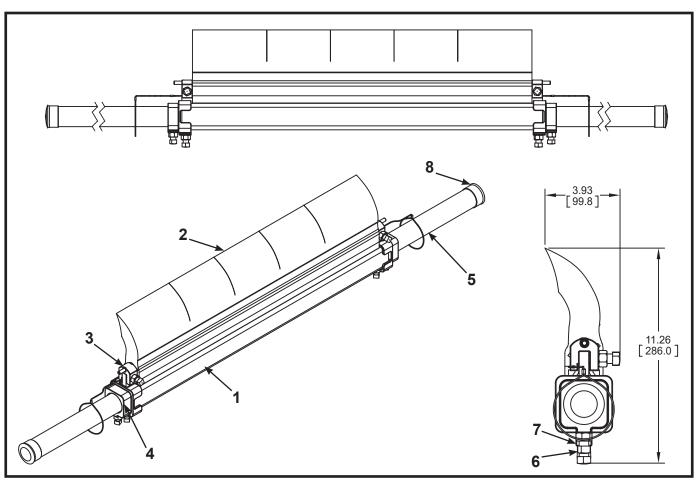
Martin<sup>®</sup> QC1+<sup>TM</sup> Cleaner HD with Three-Piece Mainframe Assembly, P/N C1QCH3SXXSXXXXX
